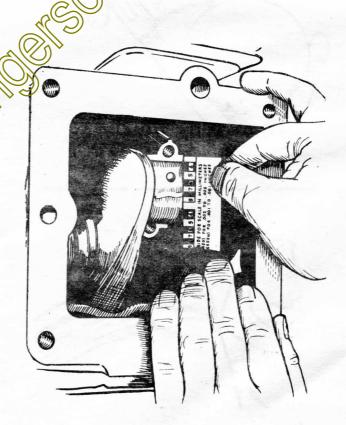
MEASURING BEARING CLEARANCE WITH PLASTIGAUGE
